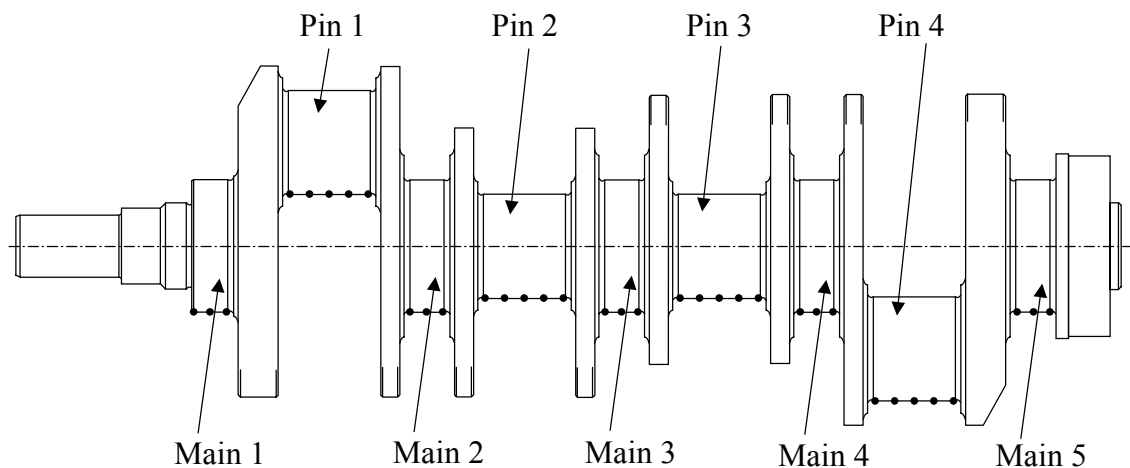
Geometry of the crankshaft in the example of Section II.3.
